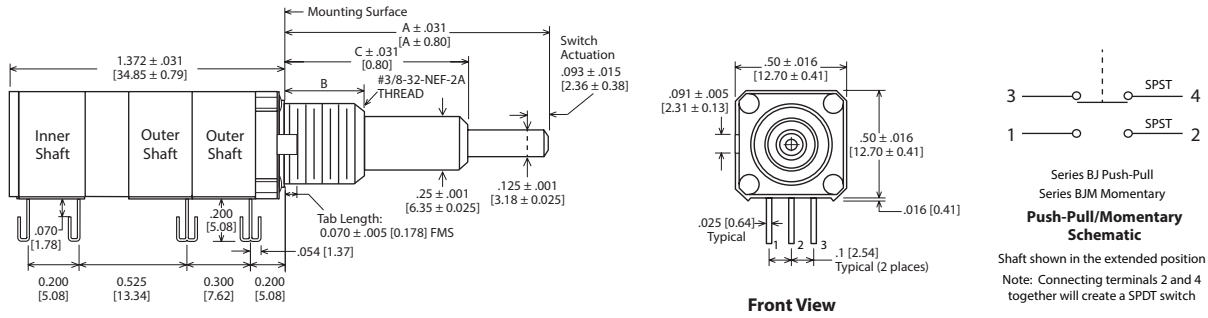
SHA12: Concentric Shafts, Solder Hooks, 2 Potentiometer(s) or RS + MP, 3/8" Bushing
